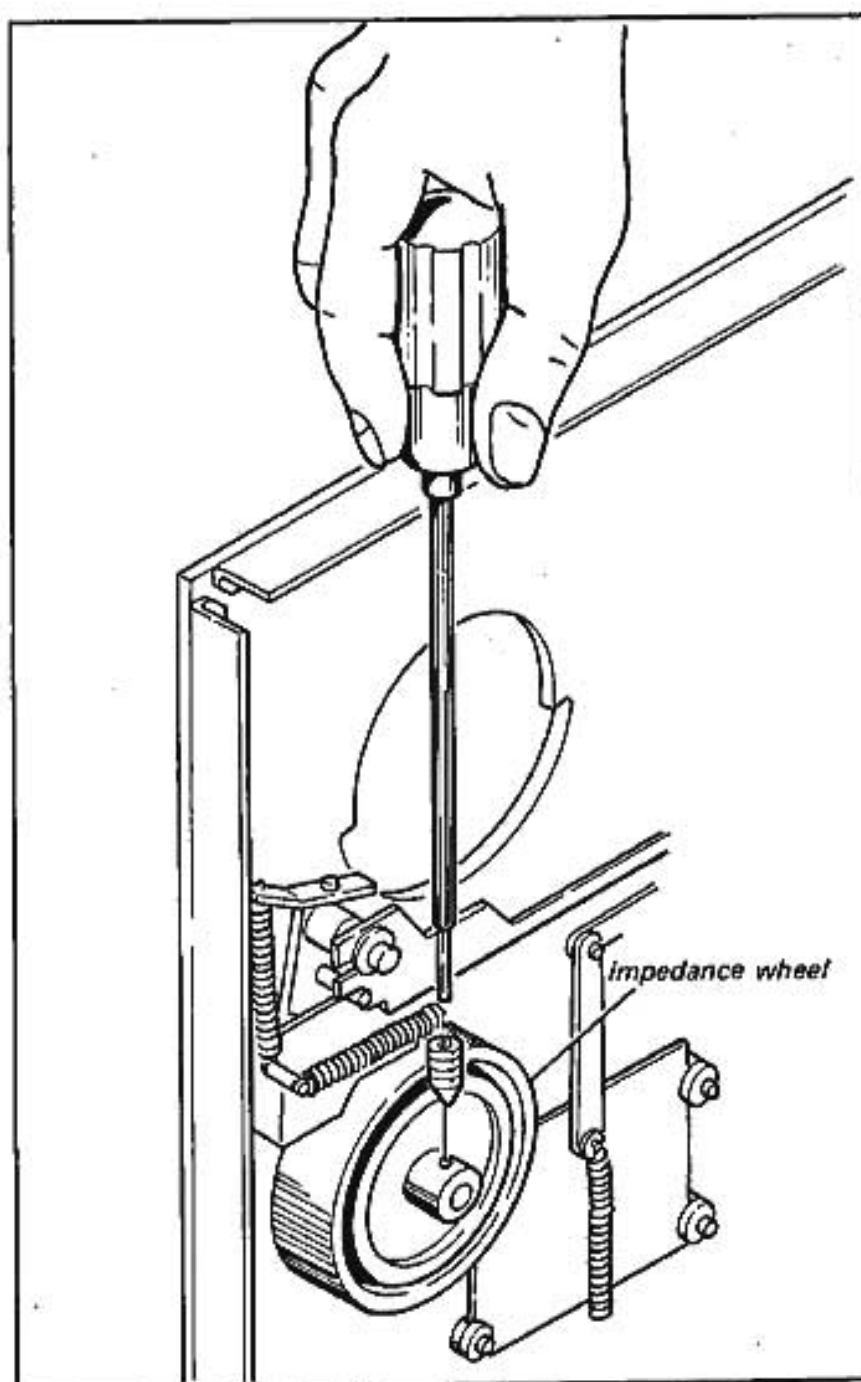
Hex screwdriver used in installing the impedance wheel
